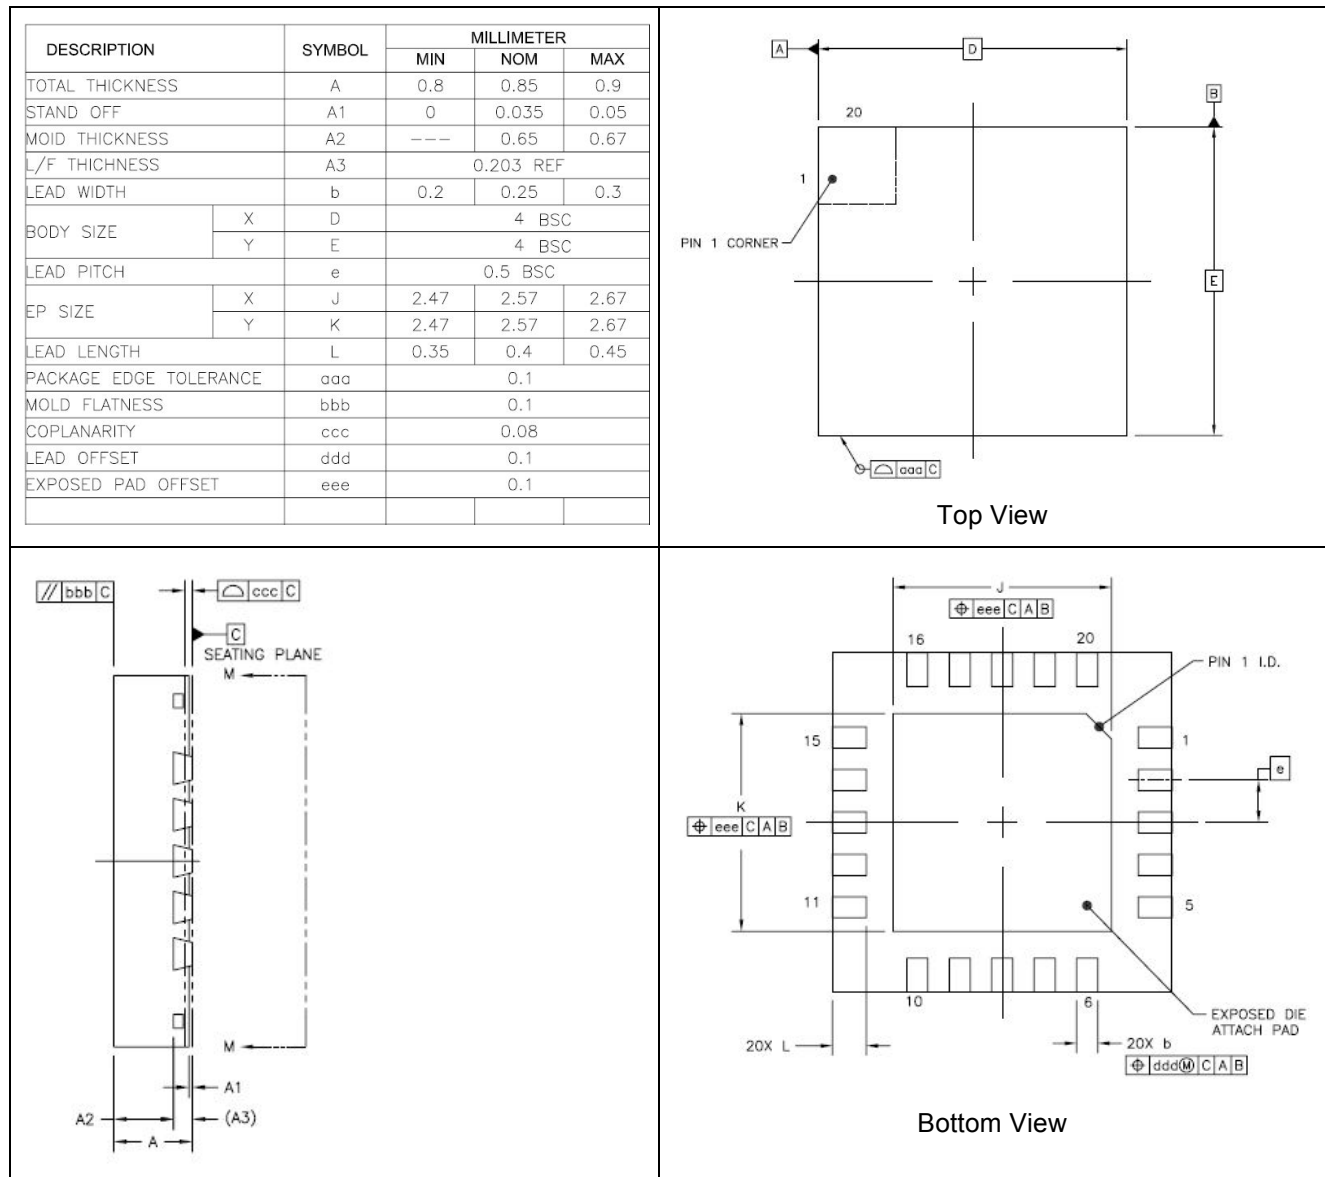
QFN 4mmX4mm 20-pin Package Dimensions
